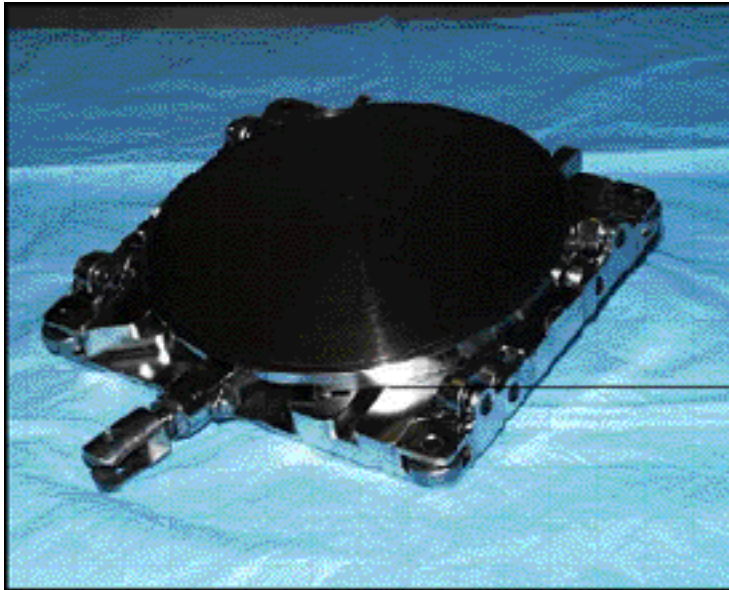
GATE AND STRONGBACK ASSEMBLY AFTER REASSEMBLY
